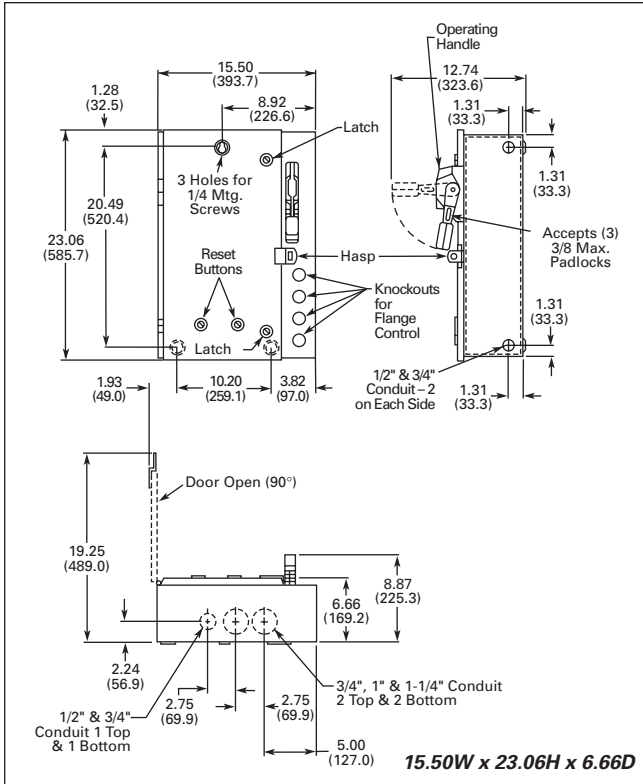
Box B, Type 1 — Approximate Dimensions in Inches (mm)
